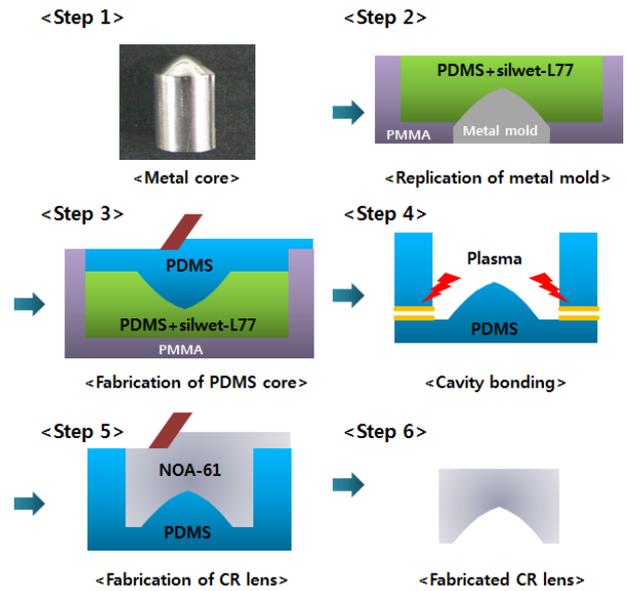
Fabrication method of CR-lens using PDMS casting and UV-embossing process
